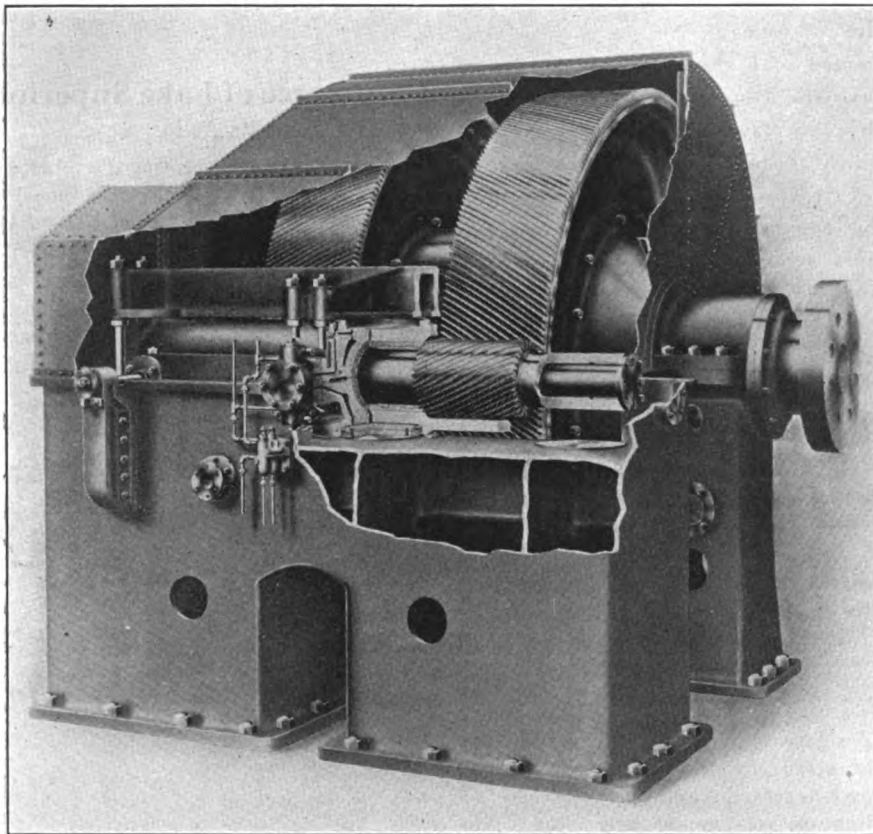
PERSPECTIVE VIEW OF GEAR INSTALLED ON COLLIER NEPTUNE
